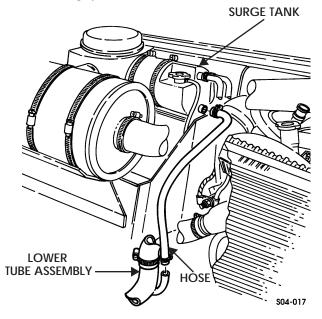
Surge Tank-to-Lower Radiator Tube Hose
